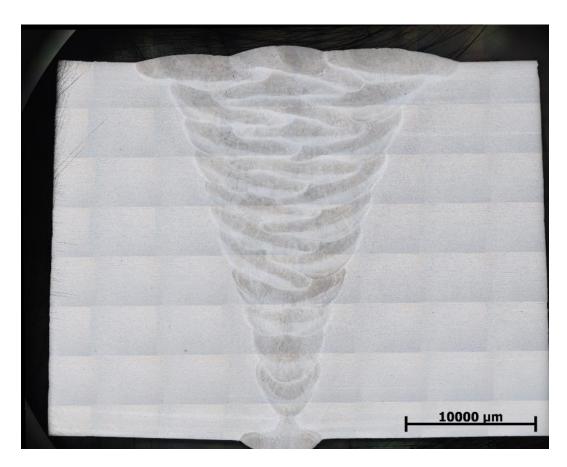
Cross-section view of the W2 weld. No apparent weld defect or cracking were observed.
